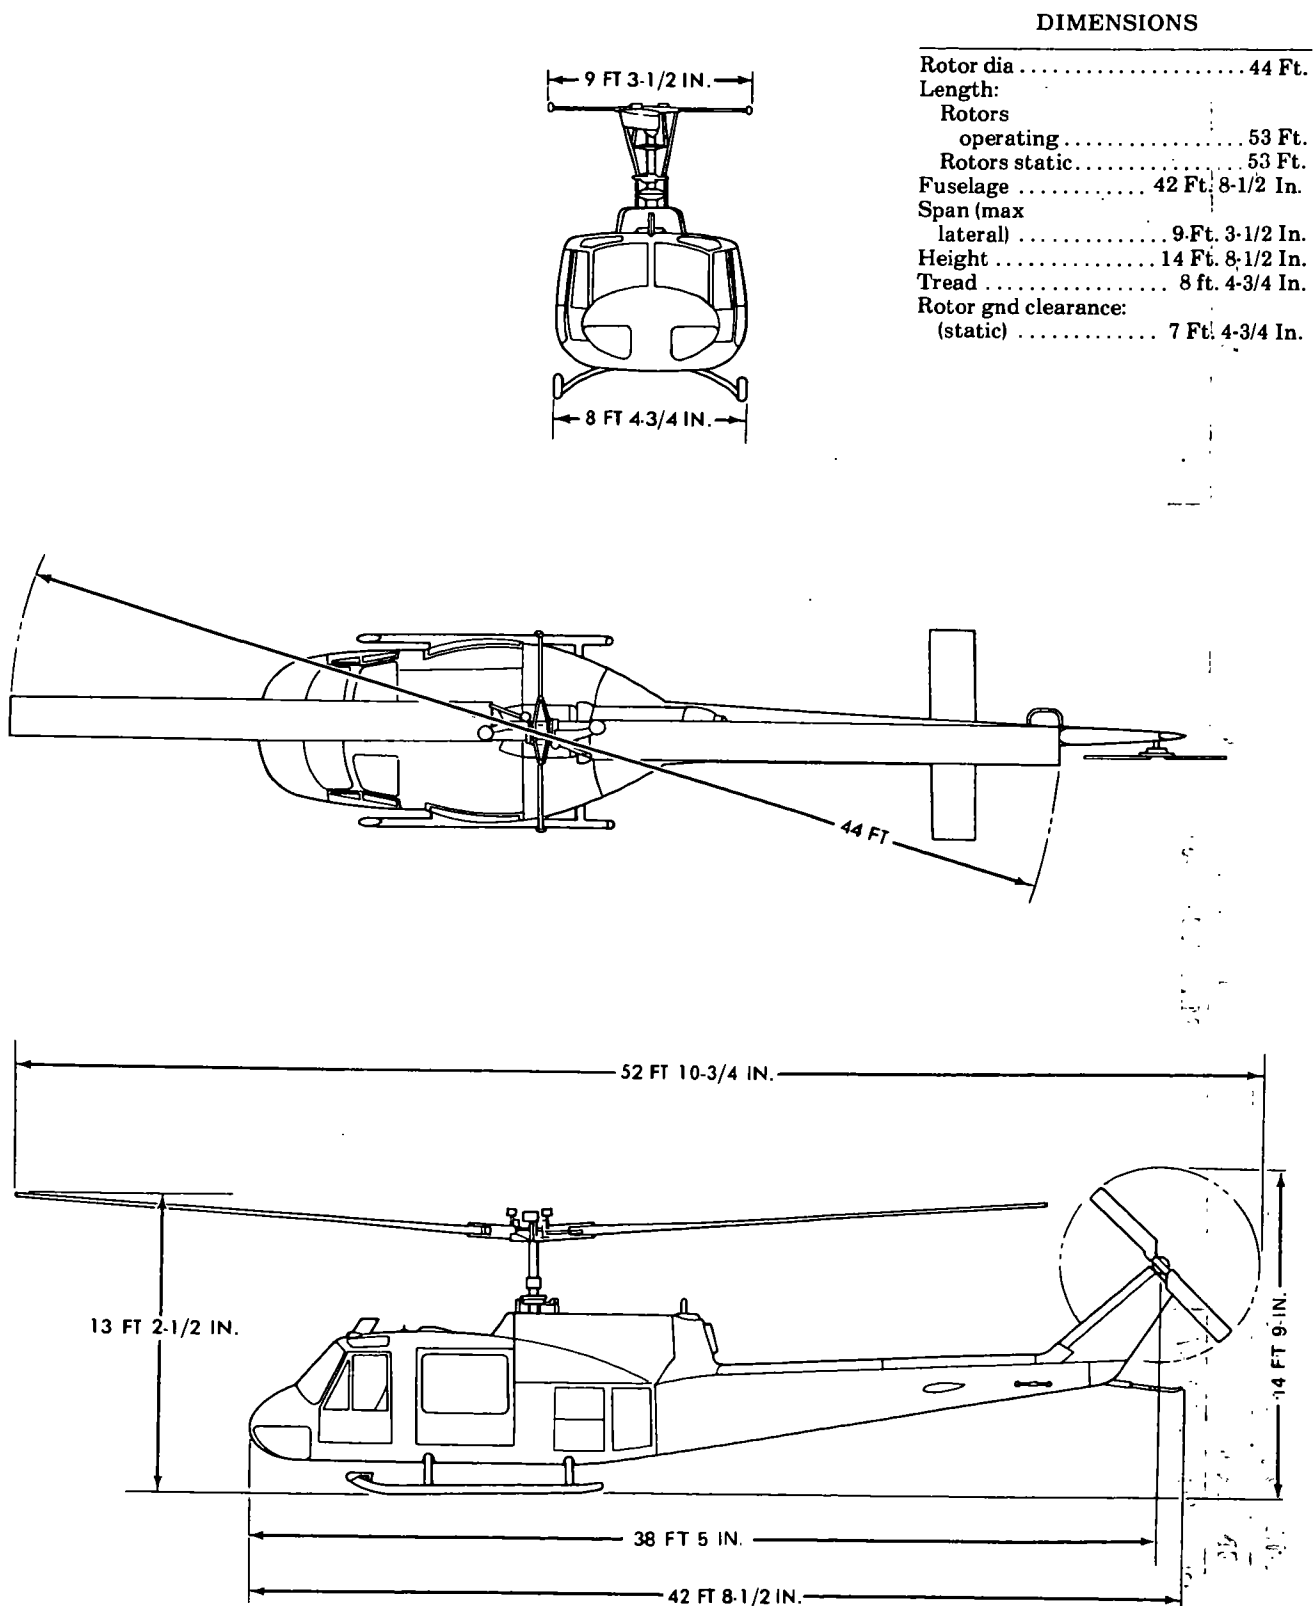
Principal Dimensions, UH-1B (Iroquois)
